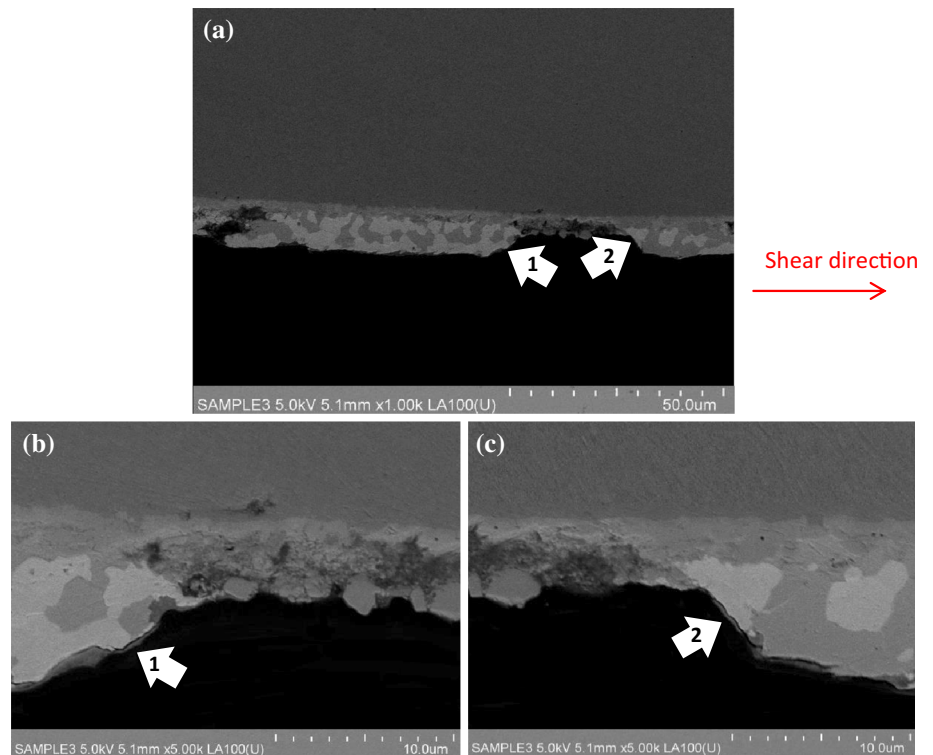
Cross-sectional FESEM view of fractured solder joints reflowed at 230 °C a at the edge of bottom half b top half c bottom half
